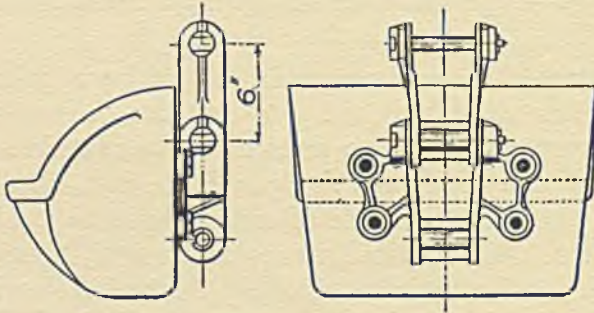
Malleable Iron Bucket Bolted to Ley Chain.
